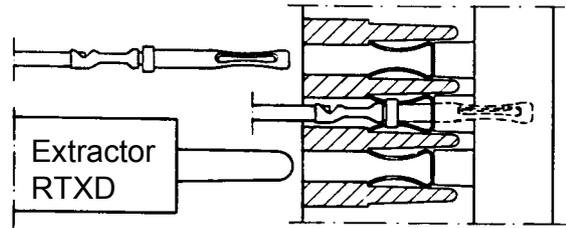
The terminal socket locks in place by a retaining clip inside the relay terminal base. To extract the wire a simple plastic tool type RTX D is used
